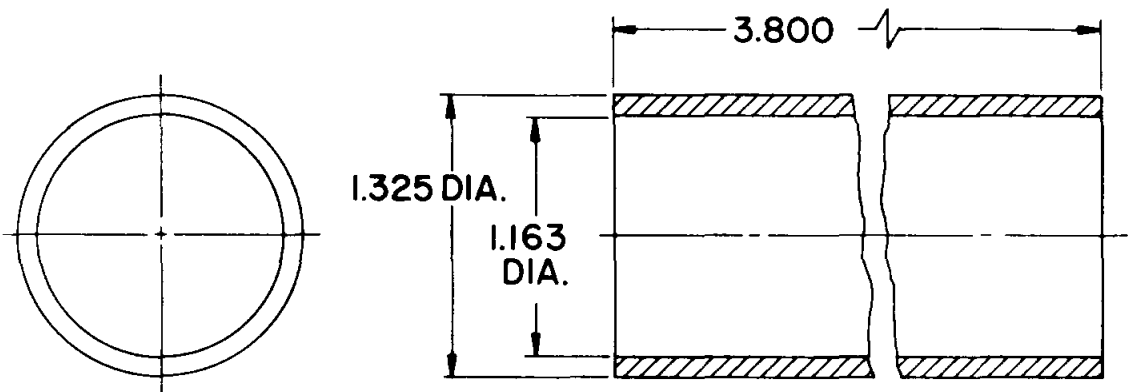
Drawing showing furnace heater sleeve. Dimensions are in inches.
